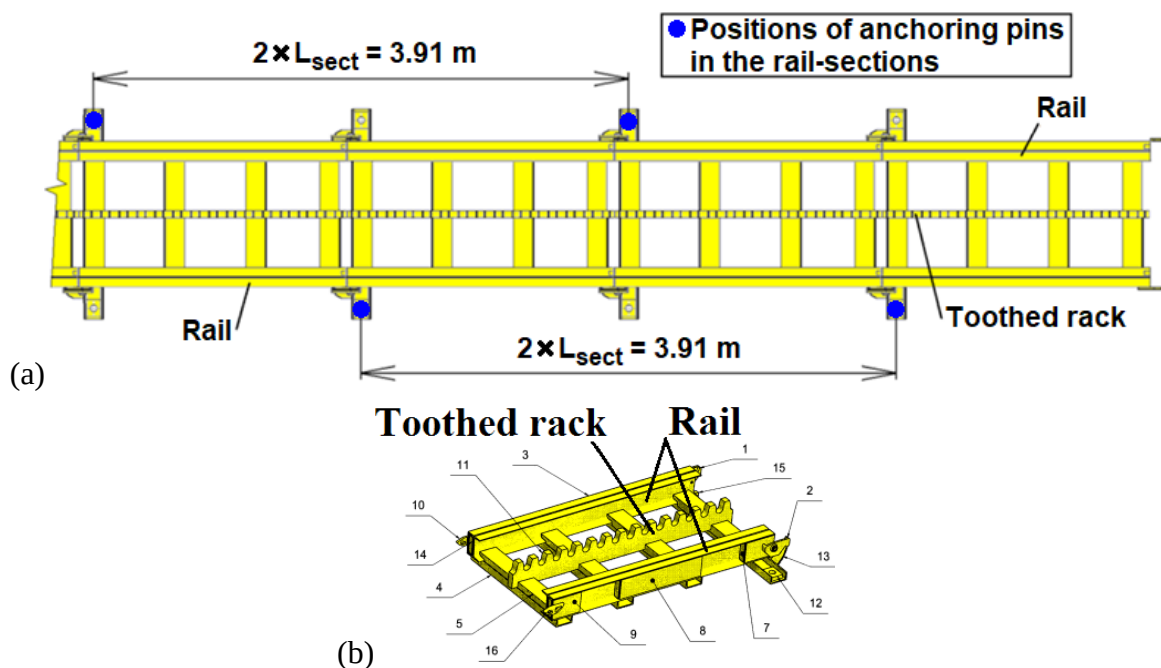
(a) System of joined sections of a rack-railway track placed on a footwall (ground plan) and (b) the perspective projection and design of one section
